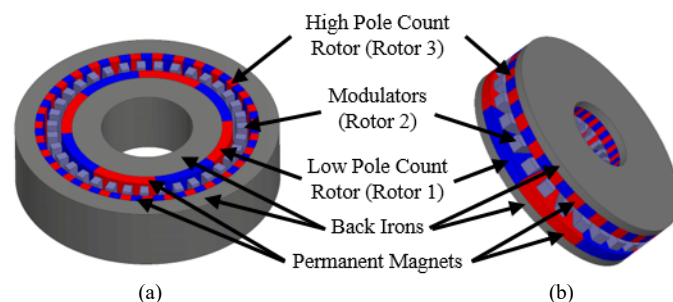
Coaxial (a) radial flux and (b) axial flux magnetic gears with surface-mounted permanent magnets.
